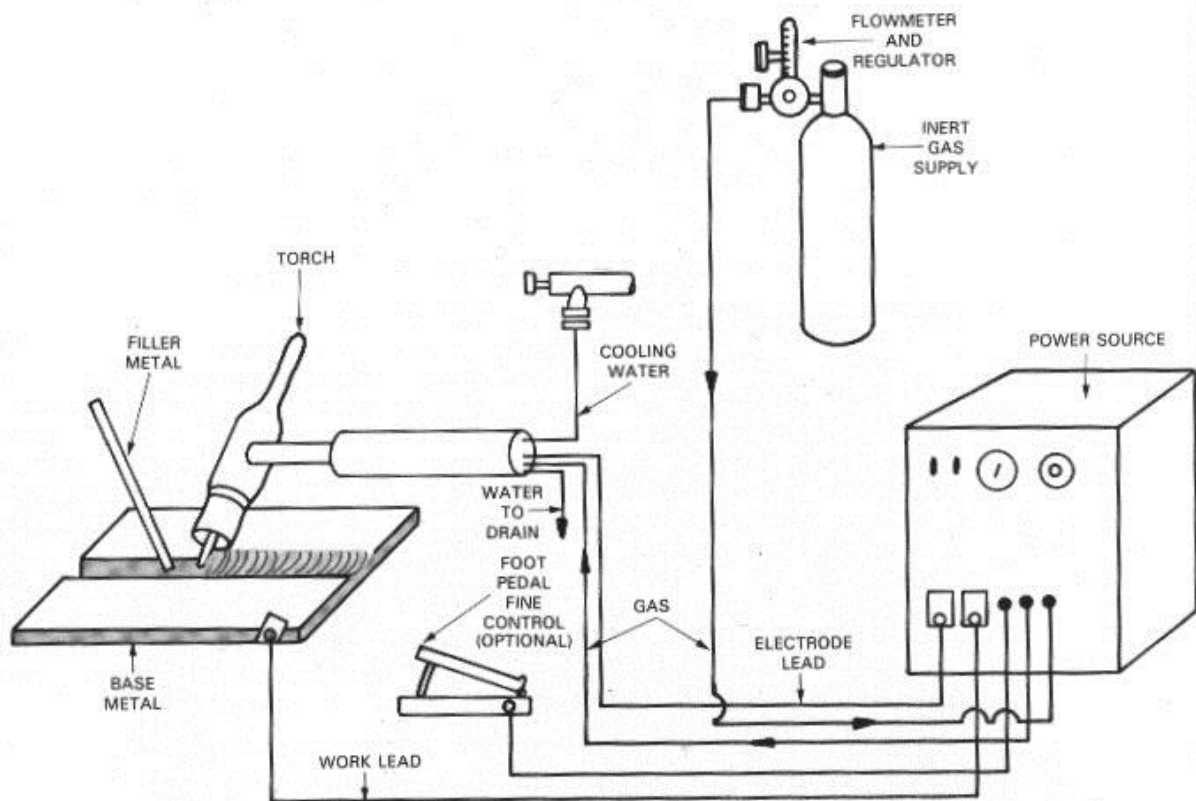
TIG Welding Setup [Ref.: office.pickproducts.com.au]
